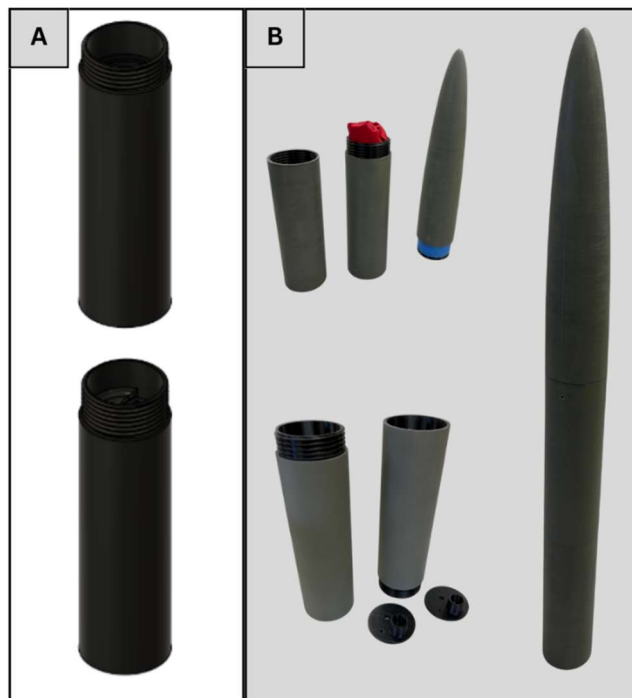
CAD Airframe Segments (A) and ABS Printed Airframe (B)
